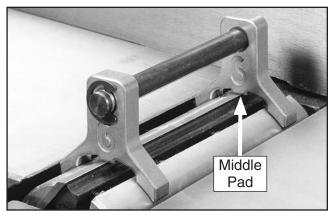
Example of knife-setting jig positioned over cutterhead knife.
